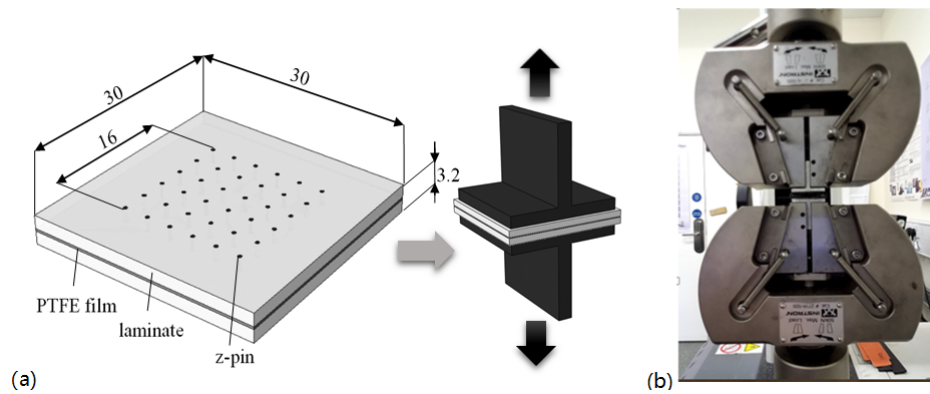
Mode I pin pull-out test (a) test specimens geometry and mounting jigs (b) test fixture in test machine
